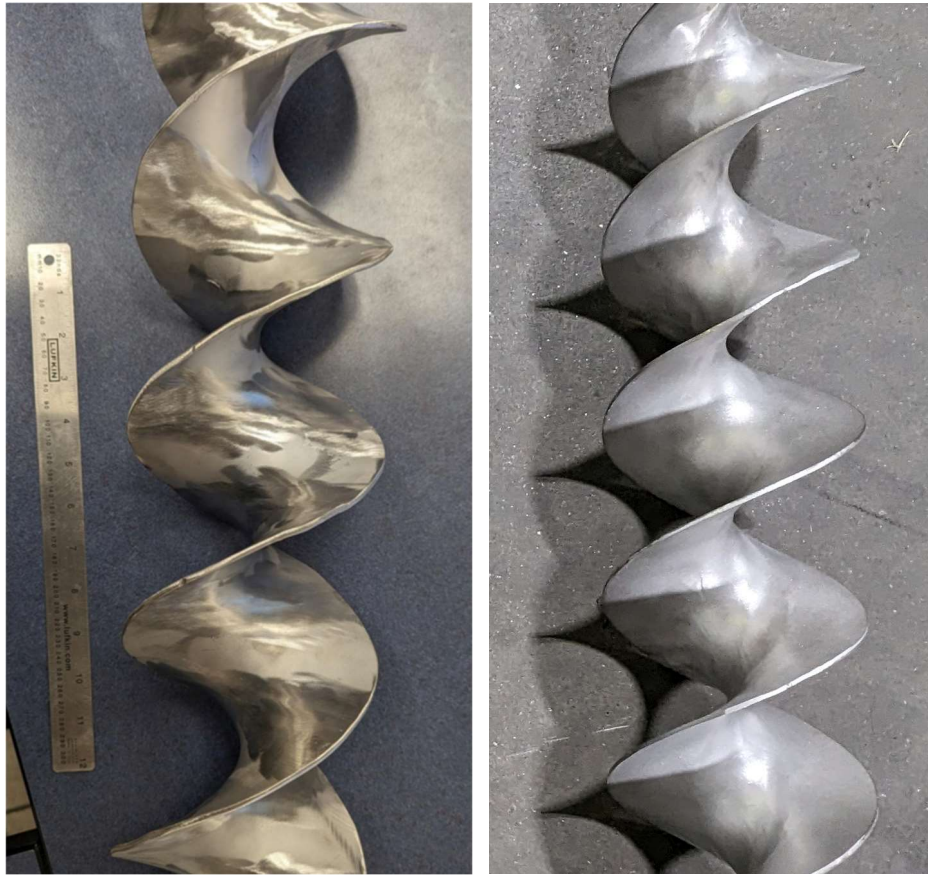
Double start cylindrical spirals manufactured using (a) GTAW with 3mm thick 316L SS and (b) HLBW using 2 mm thick 316L SS [courtesy of Apollo Machine, Canada].
